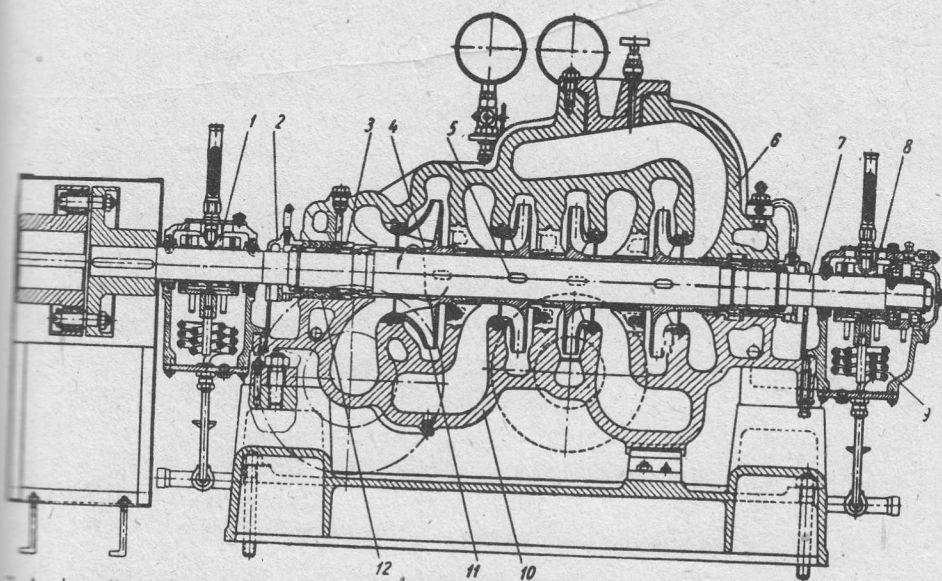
AKSB (FRG) impeller pump with sectional casing fitted with stiff partition
